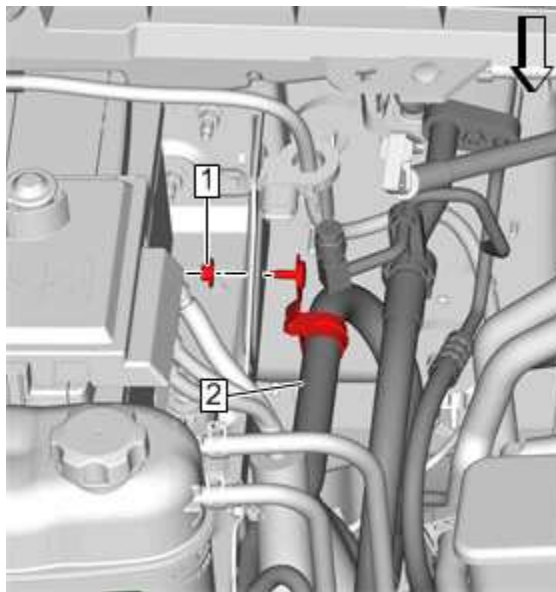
Air Conditioning Compressor Hose At Battery Tray
